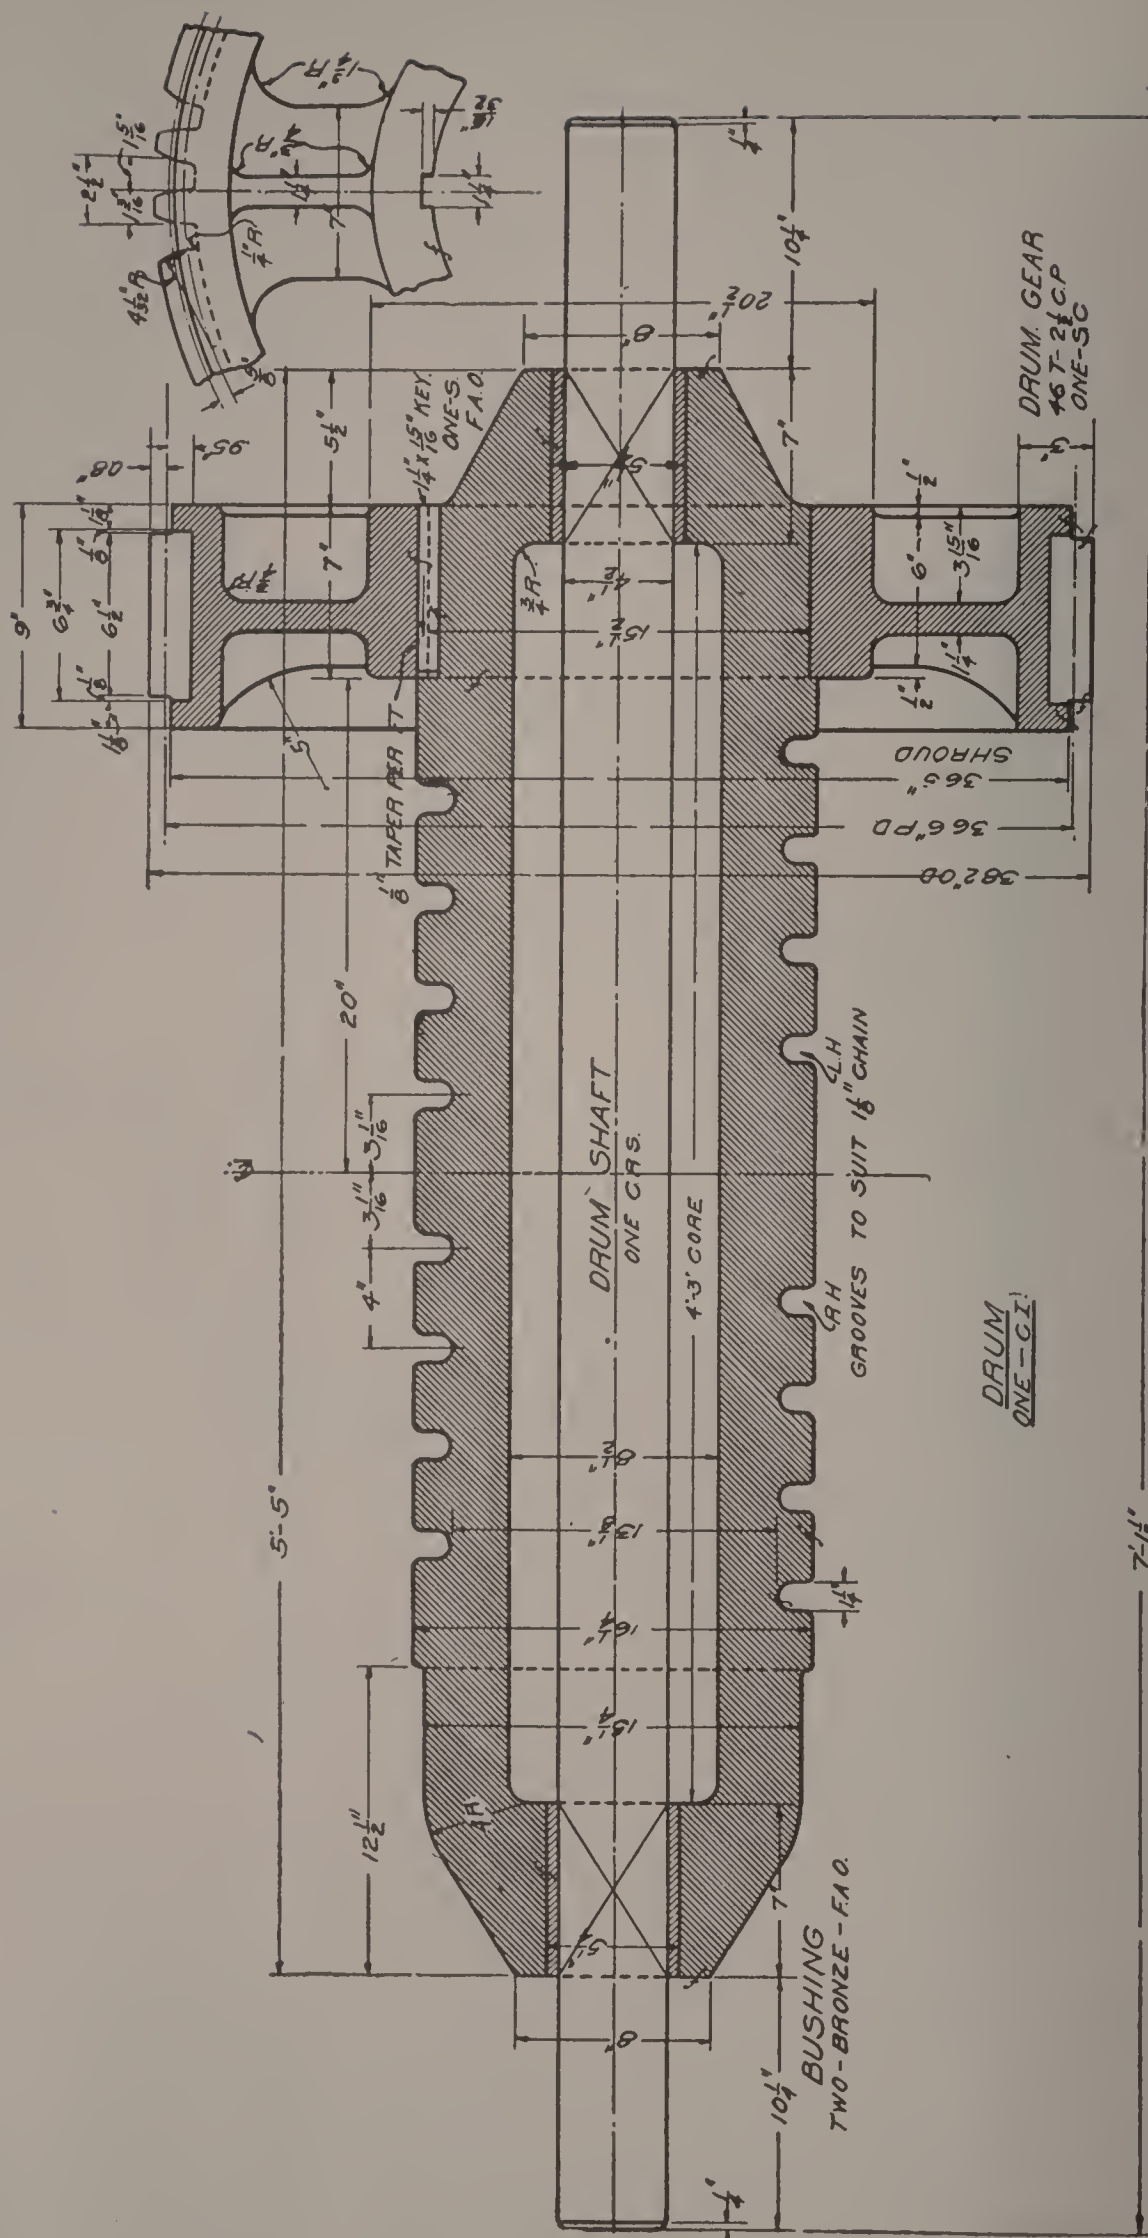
Detail of Hoisting Drum to Carry Wire Rope
